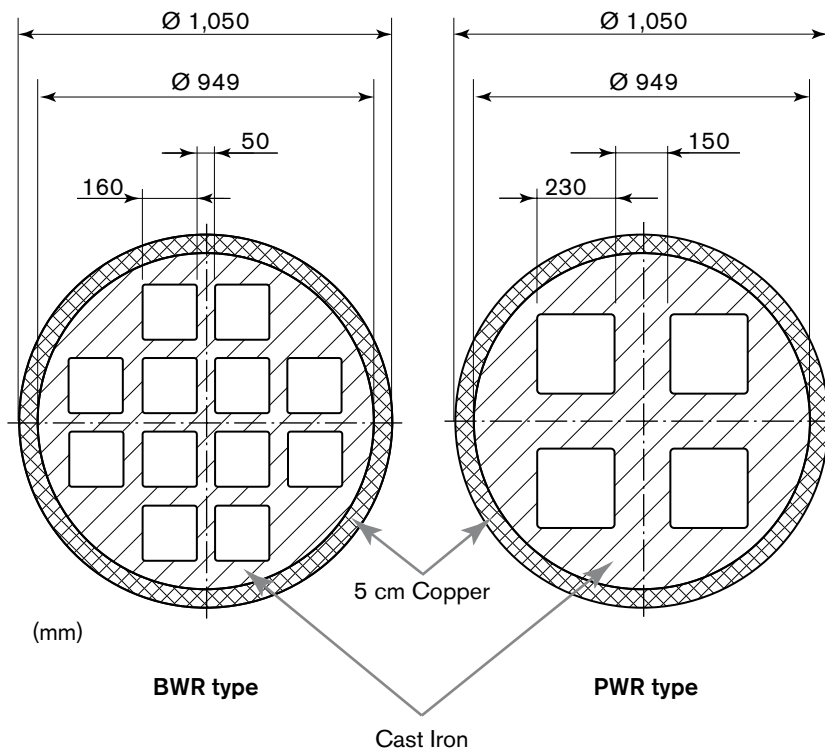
Schematic design of insert for 12 BWR or 4 PWR assemblies for a 5 cm thick copper shell.
